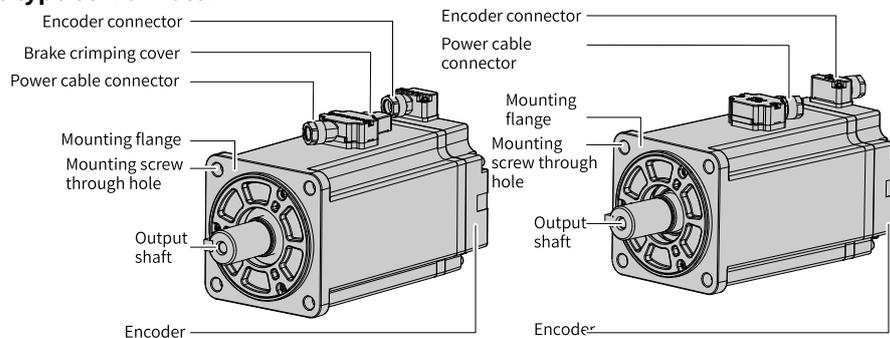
Components of a terminal-type servo motor (Left: motor with front cable outlet; Right: motor with rear cable outlet)
